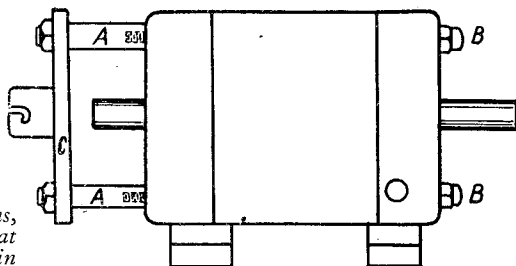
Extension fitting for shaft. "A.A." extension-pieces fitted instead of cap nuts "B.B." Cross-bar "C" for attachment of outer casing.
